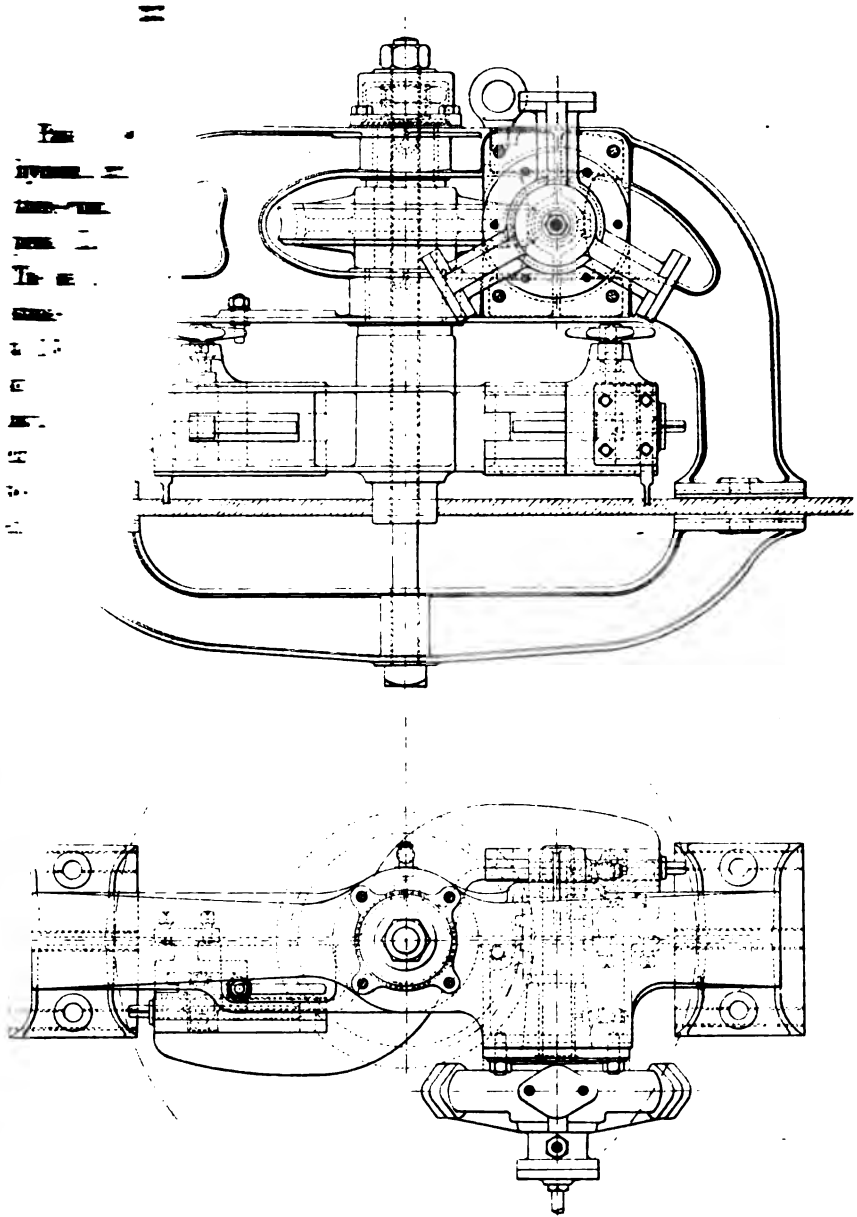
shows another form of the apparatus, the motor and drill press being separated, the power being conveyed through a flexible shaft. In this case the engine is bolted to a driving attachment, to which one end of the flexible shaft is connected, the other end being connected to the drill press. This form of the apparatus allows of the engine remaining in one place whilst any number of holes may be drilled within the range of the flexible shaft, the drill press only being moved from hole to hole. The apparatus like the direct drill is provided with handles for carrying about.
